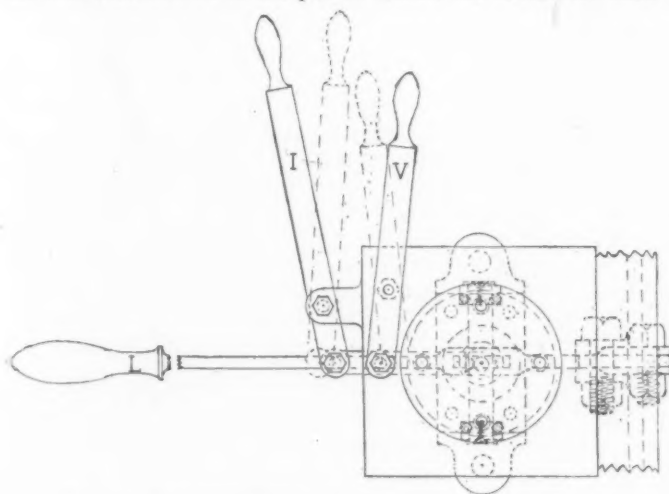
SHOWING THE SPRUE CUTTER MECHANISM.
